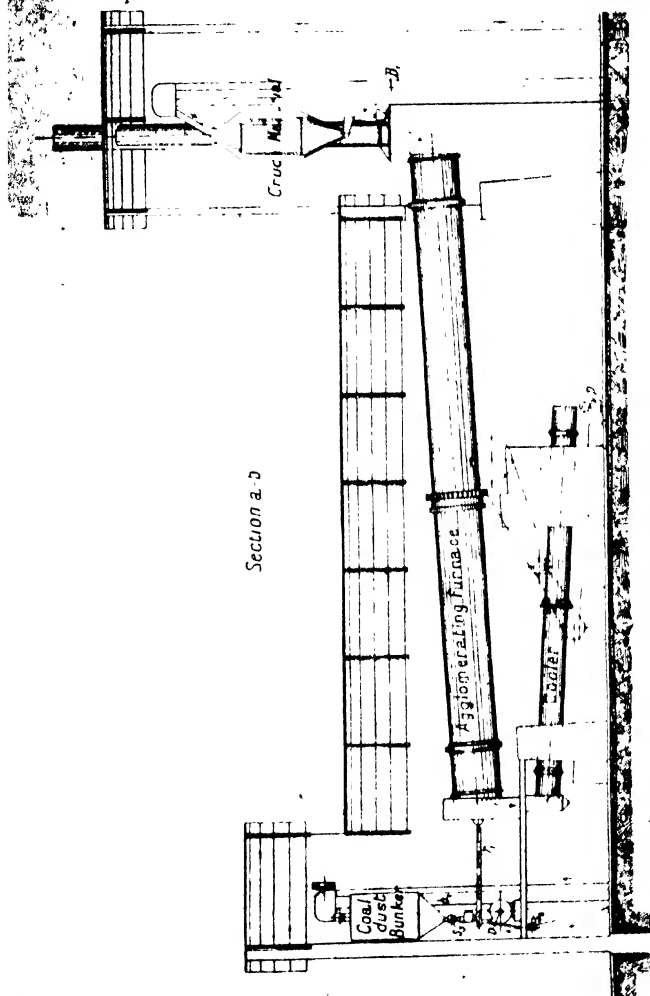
Revolving tubular furnace by Feiner & Ziegler
